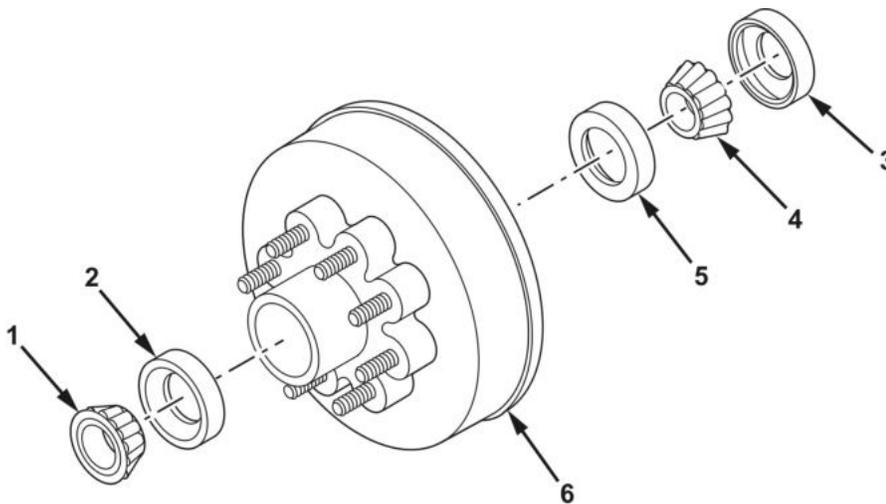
Hub/Drum, Race, and Bearing Seal Assembly.
